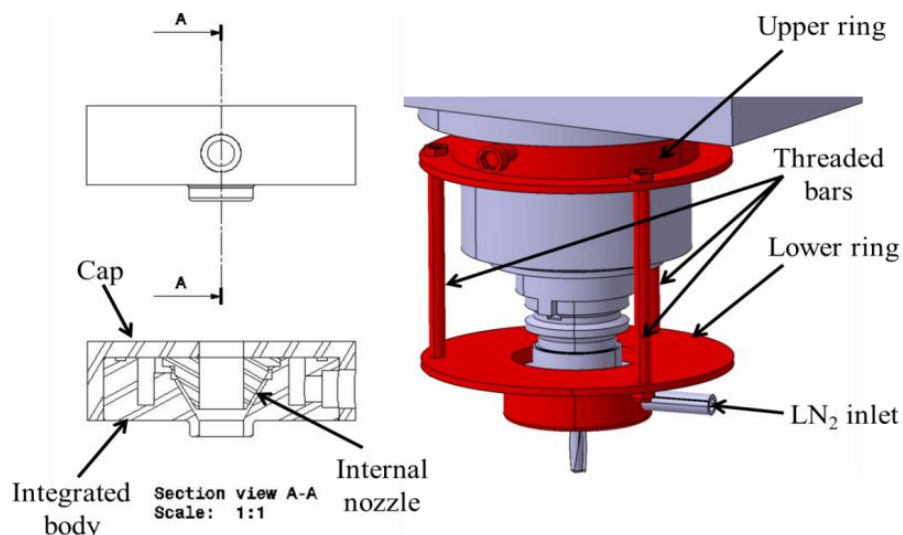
Updated design of cryogenic shower nozzle and clamping system after conducting a set of machining trials
